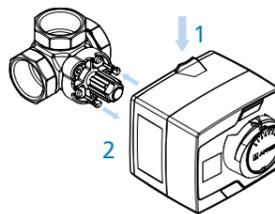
Mounting/dismounting of an ACT ProClick controller on a valve
